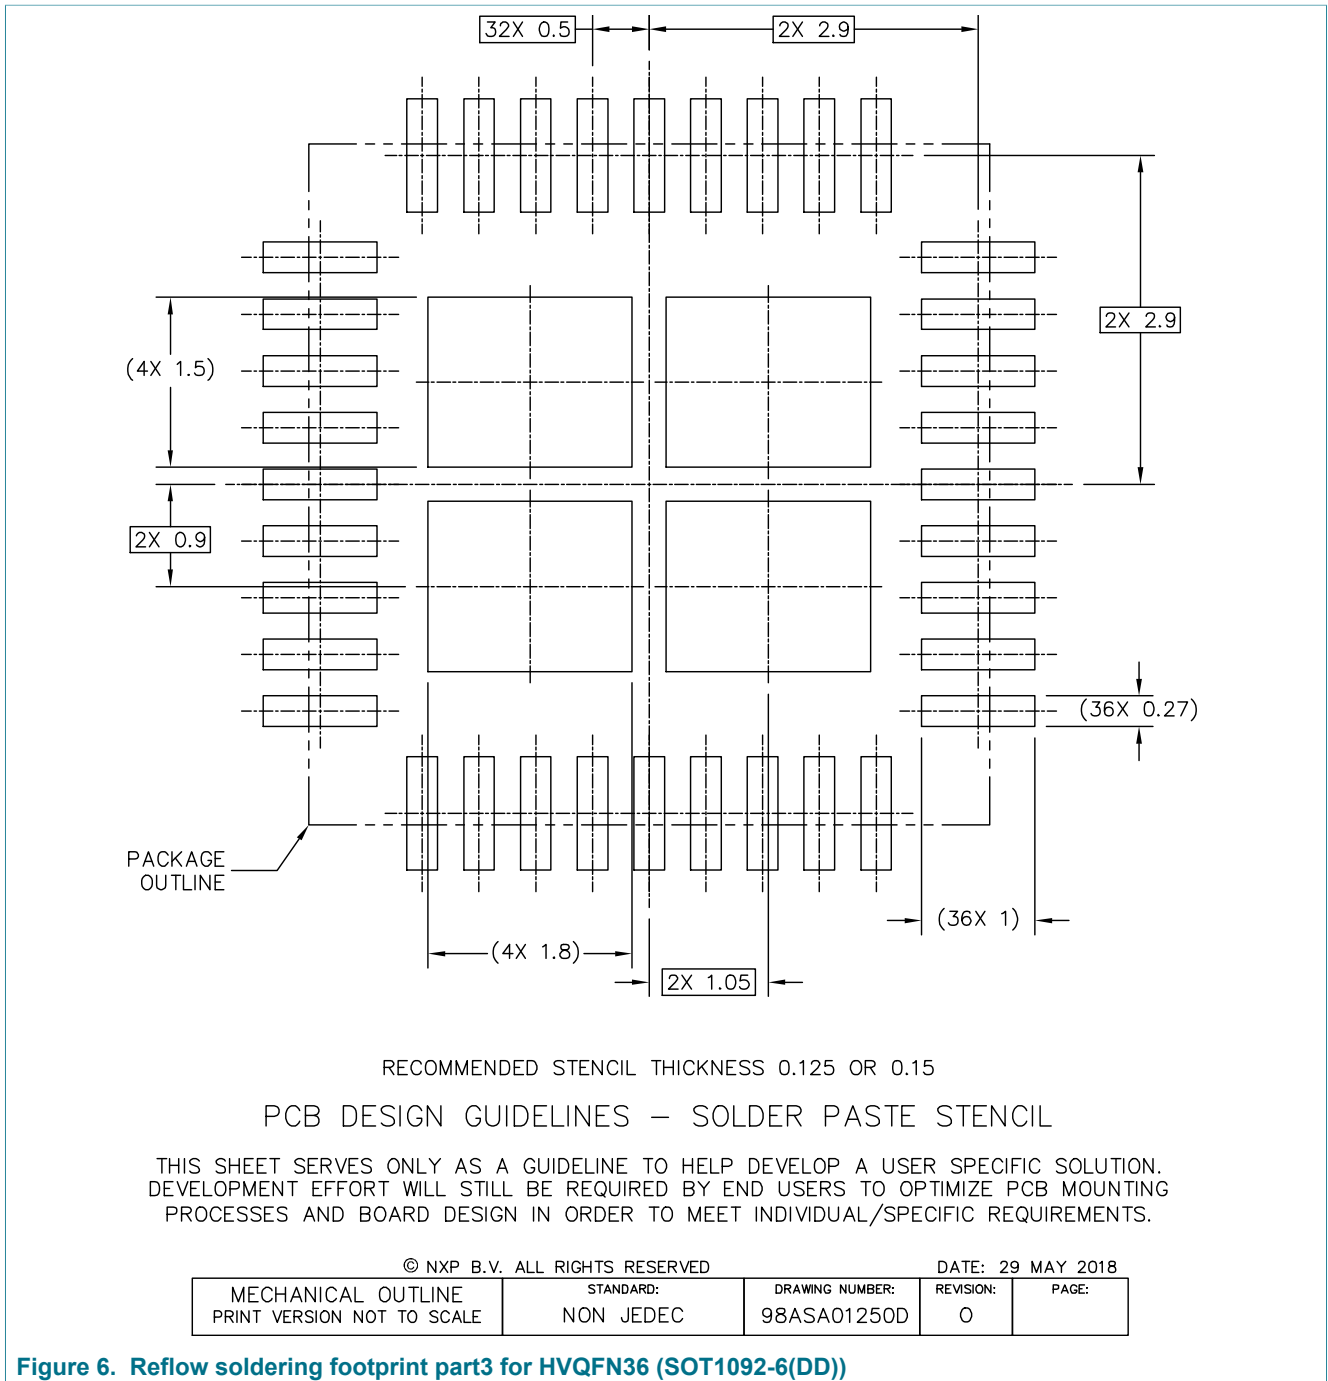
Reflow soldering footprint part3 for HVQFN36 (SOT1092-6(DD))
